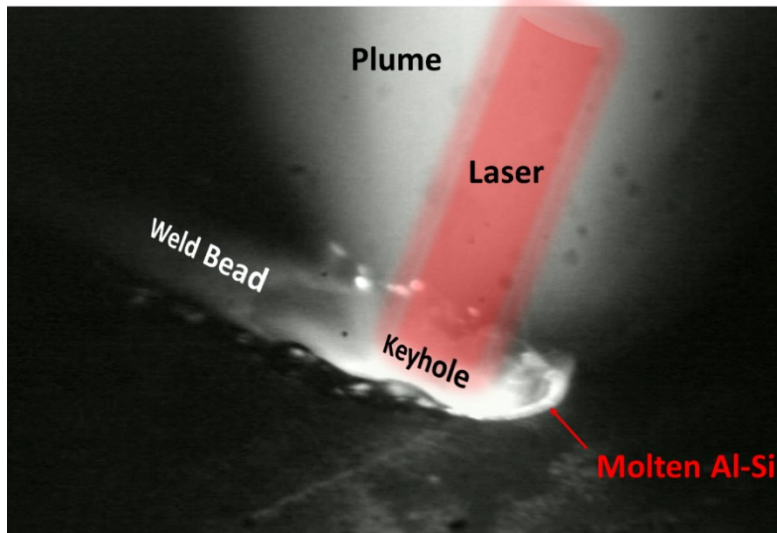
Zoomed in image of the weld zone showing the outer boundary of the molten weld pool surrounded by the molten Al-Si coating which has a much lower melting point as compared to the substrate.
